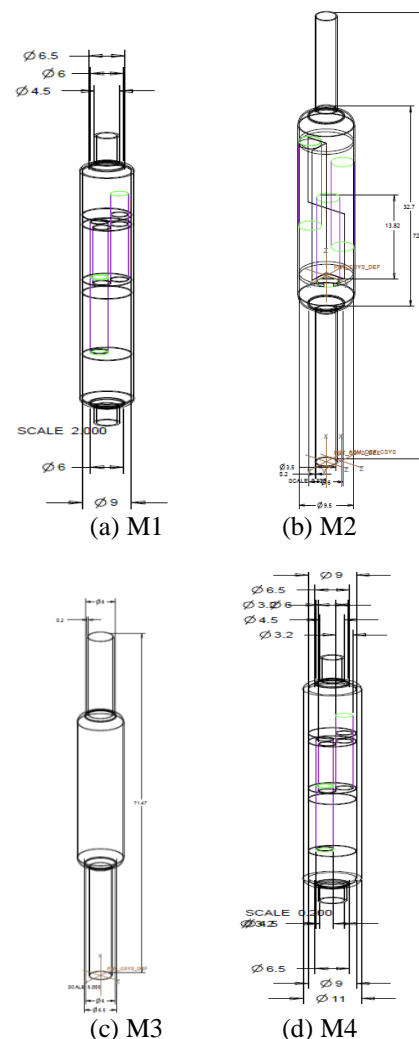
Detailed drawing of M1, M2, M3 and M4 muffler
